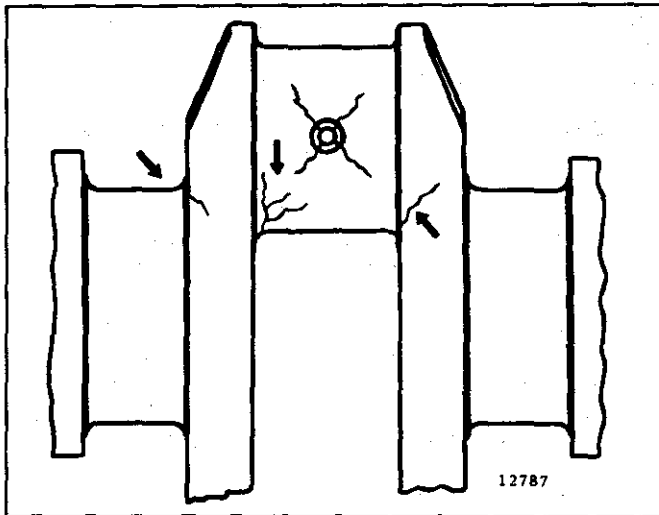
Crankshaft Fatigue Cracks
